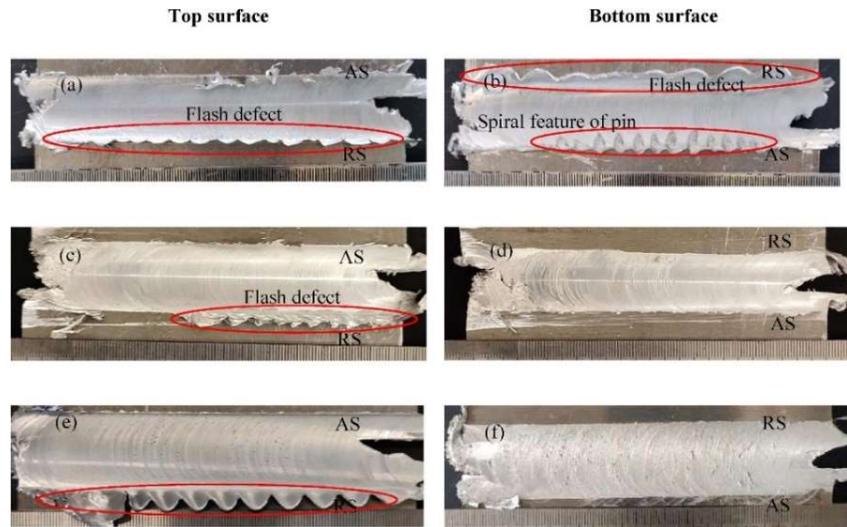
Weld appearance at top and bottom surface with different shoulder diameter (a, b) 20 mm (c, d) 22 mm (e, f) 24 mm (Fuse & Badheka, 2020).
